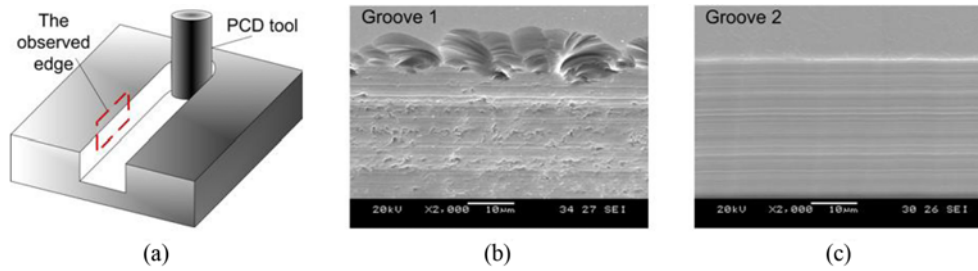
(a) The observed edge of the ECDM groove machined (b) without controlling the grinding force and (c) with controlling the grinding force
